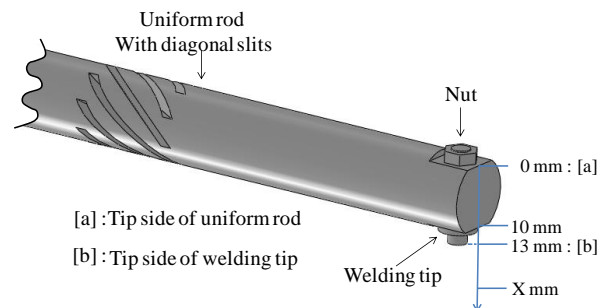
Uniform rod with diagonal slits and welding tip.
